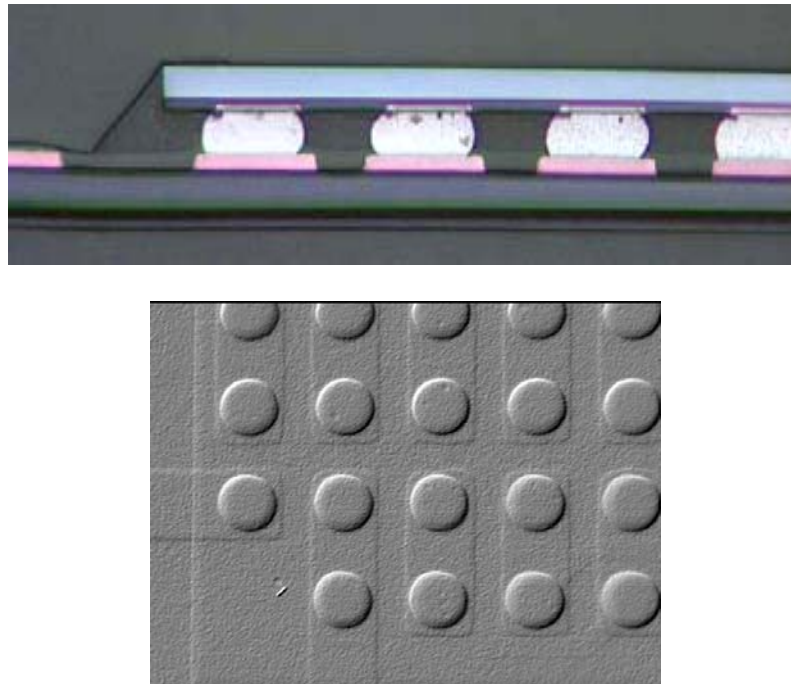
Uniform Solder Joints in 50 $\mu$ m Die on Polyimide
